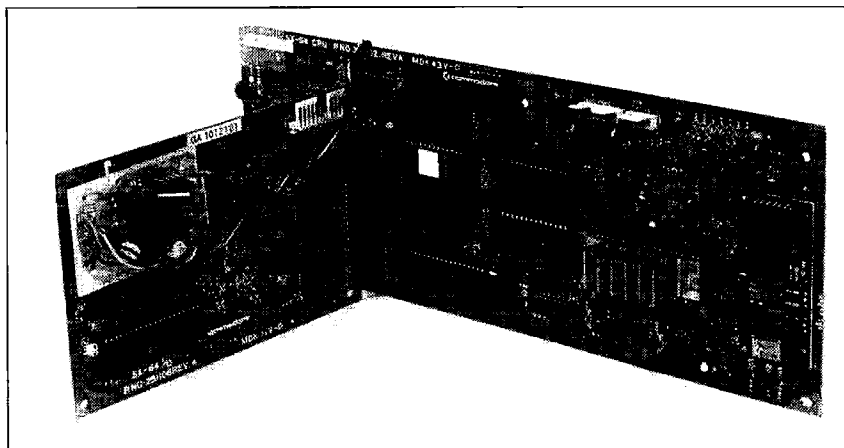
Photo C. Here's the modified N4PLK modem mounted to the SX-64's CPU and I/O boards via a circuit board standoff (upper left corner of I/O board). Connections from modem to transceiver are made by using the external serial port pin socket, cable, and DIN connector.
